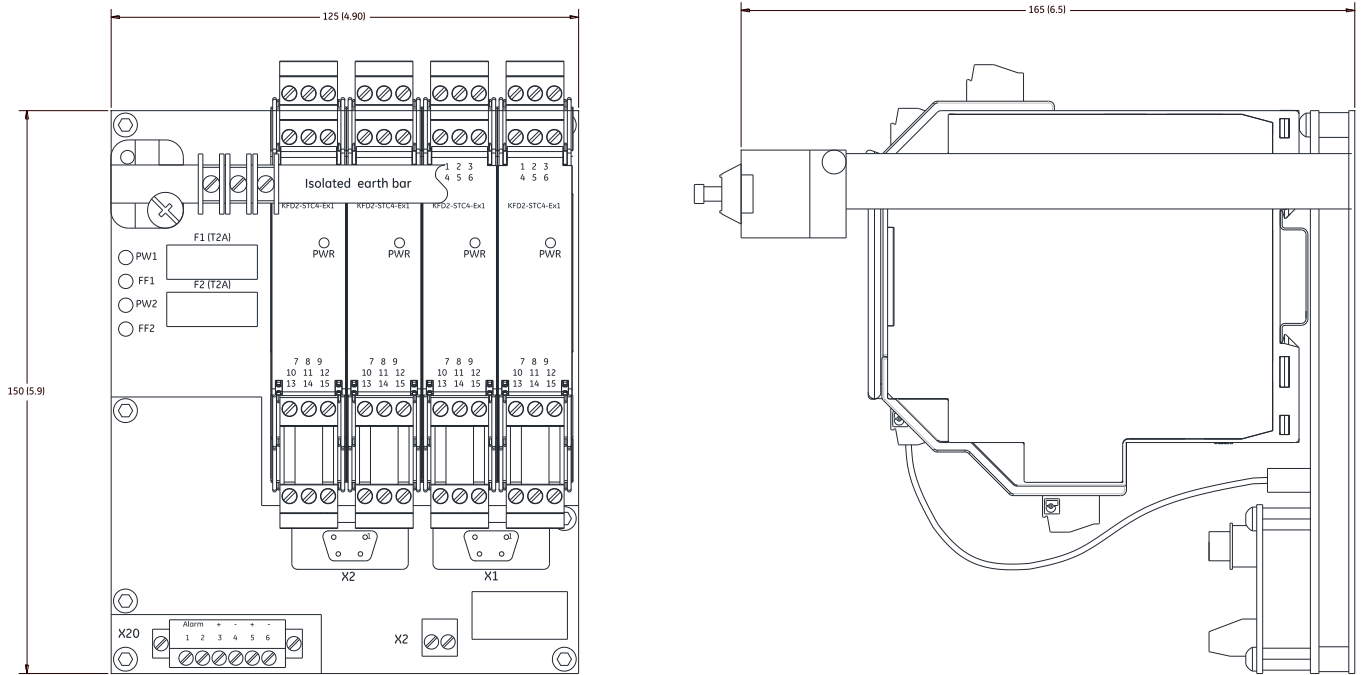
Dimensions of the MTL WP Housing (03639911)
